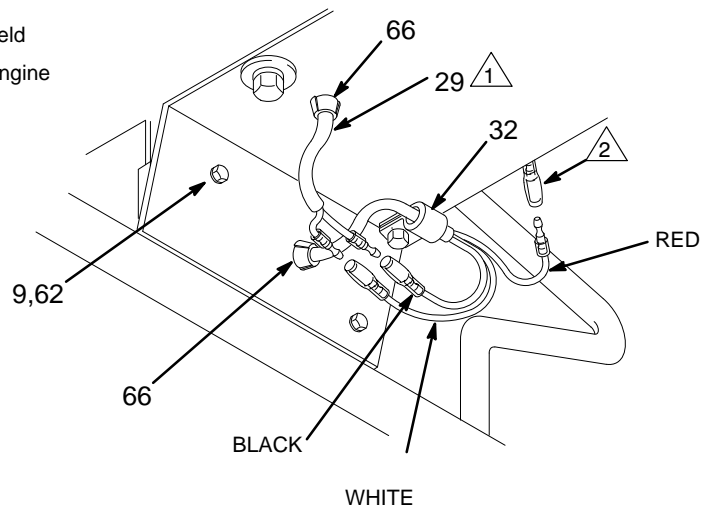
View From Under Engine Mounting Plate On Upright Cart
